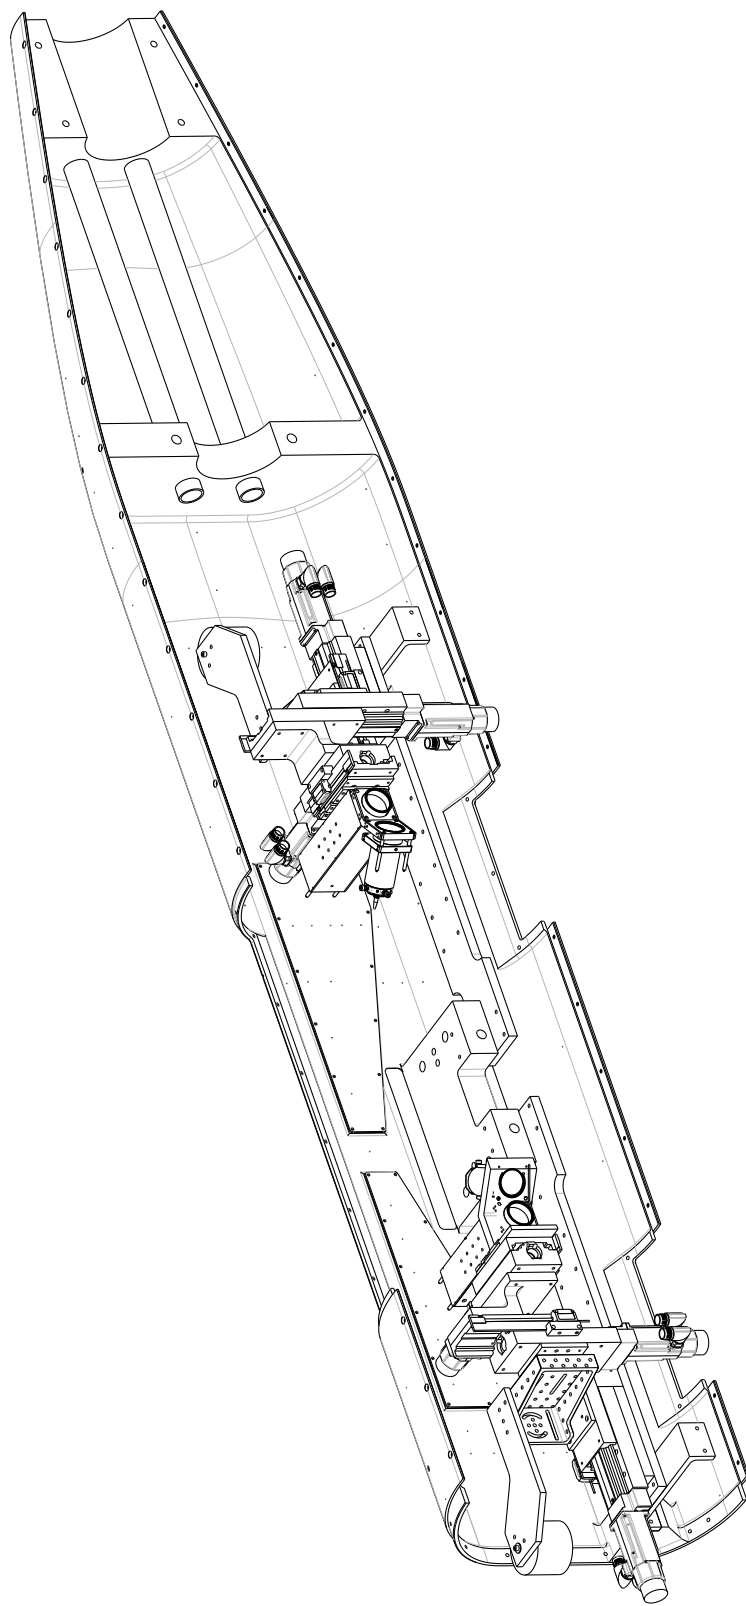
Starboard side of fuselage main section with LDV/traverse assembly.
